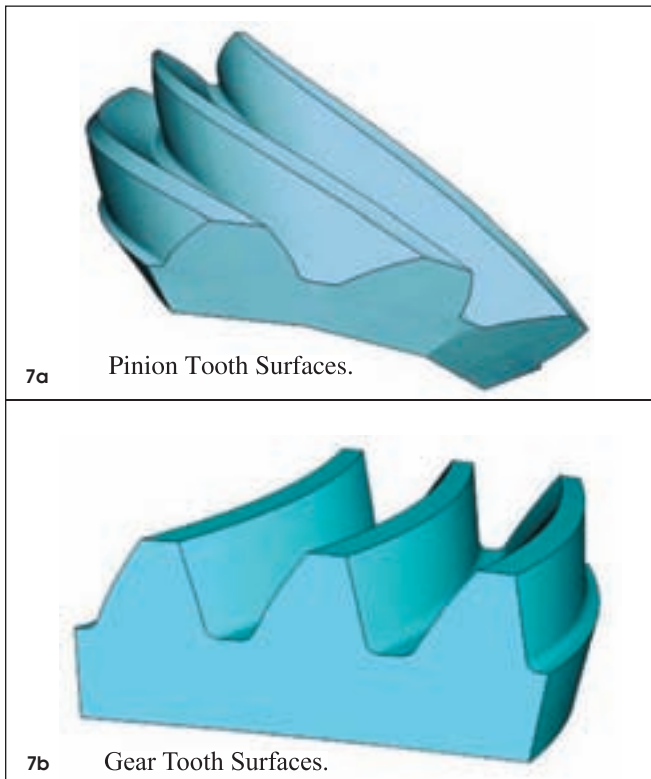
Pinion and gear tooth surfaces of a hypoid gear drive.
